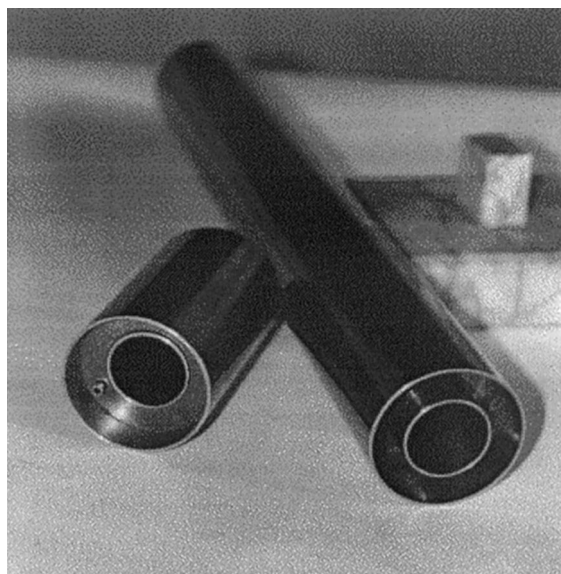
Neutron multiplier (on the right) and a trial mock-up (on the left) in steel tubes without trailer flanges manufactured by the method of LTP of porous beryllium.
